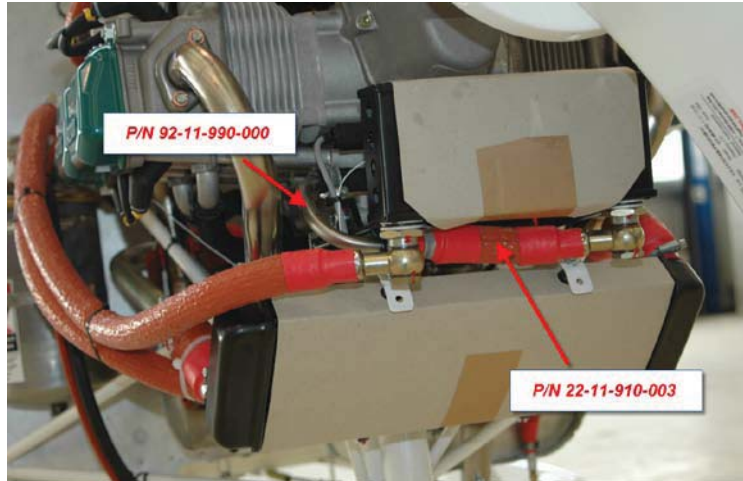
P/N 22-11-910-003 and P/N 92-11-990-000 removing
